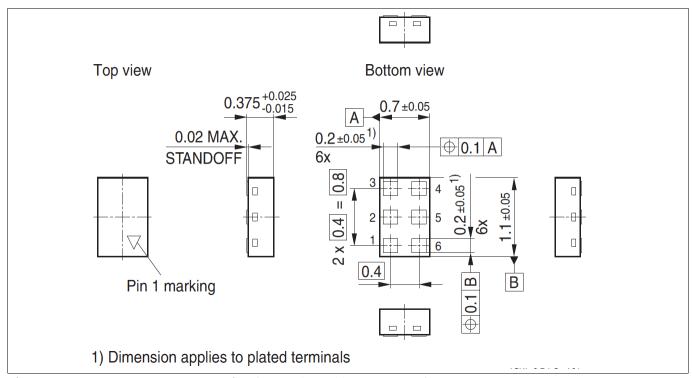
TSNP-6-2 Package Outline (top, side and bottom views)
